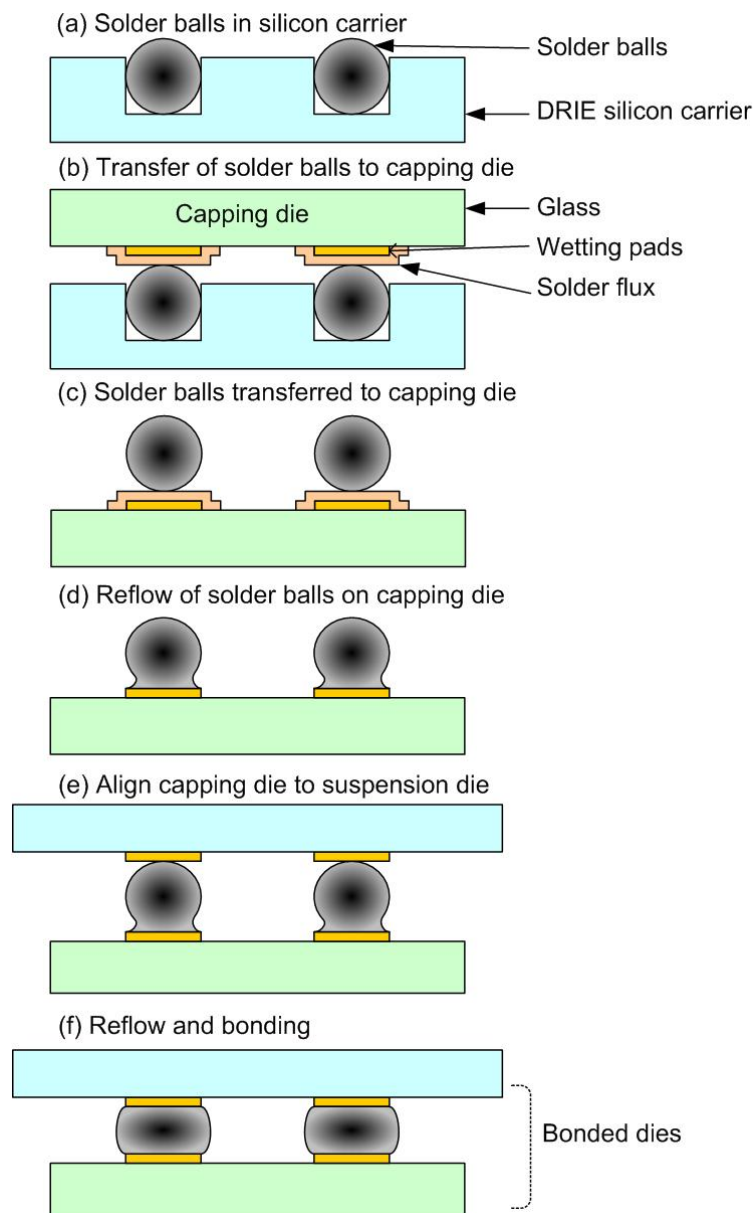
Mechanism of solder ball transfer using grooves on wafers, the grooves are etched using DRIE. The solder balls are transferred to the top capping die. The top capping and proof-mass dies are then aligned and bonded.
